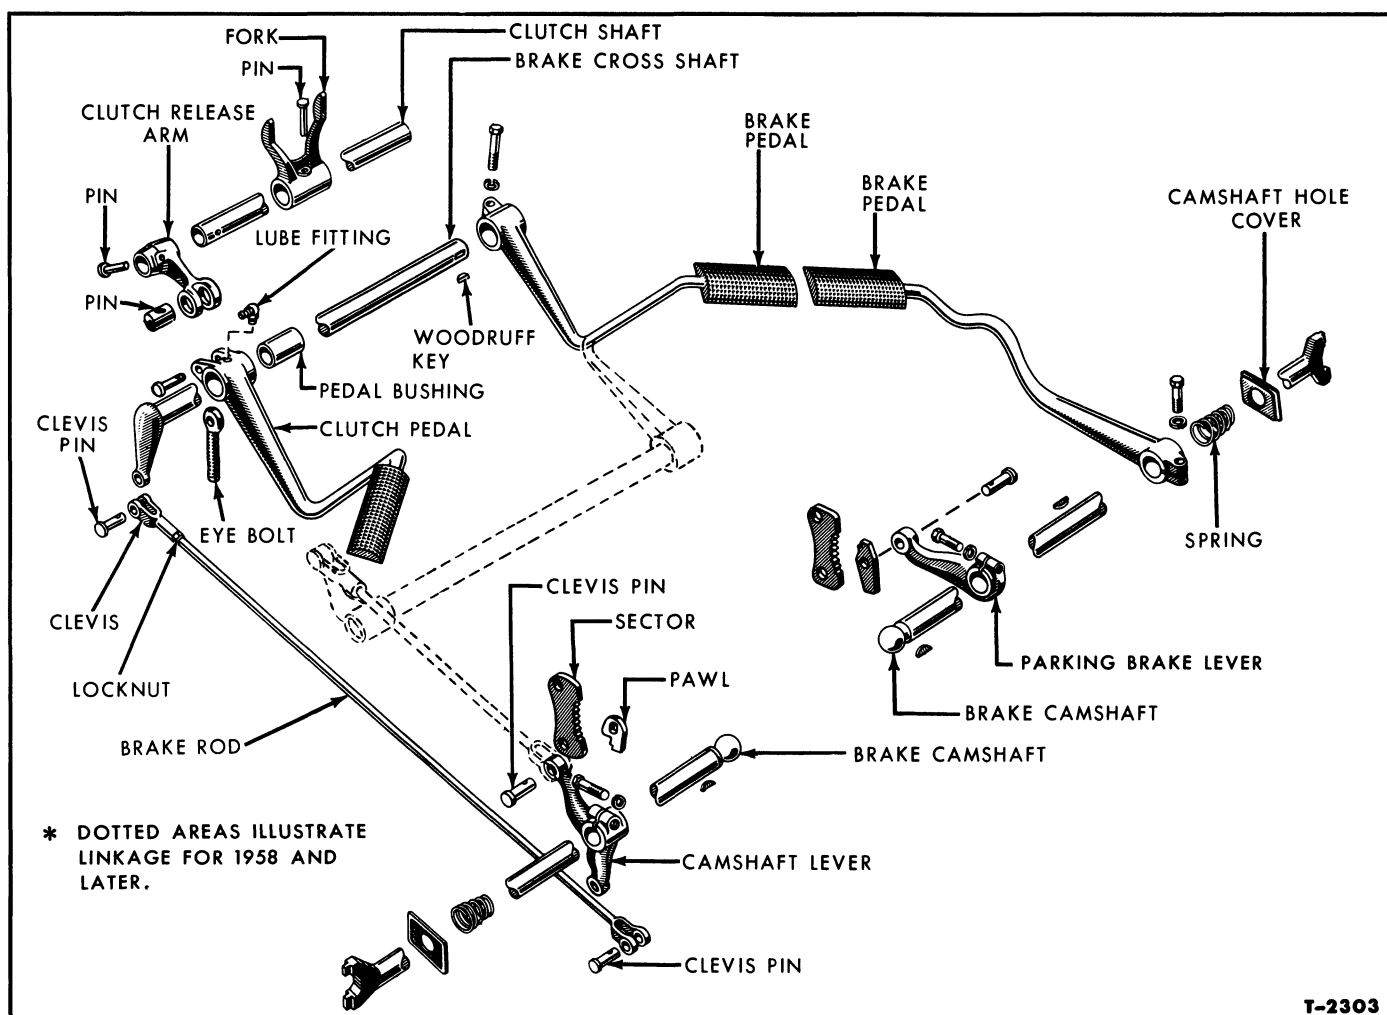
Clutch and Brake Pedals and Linkage—Typical
